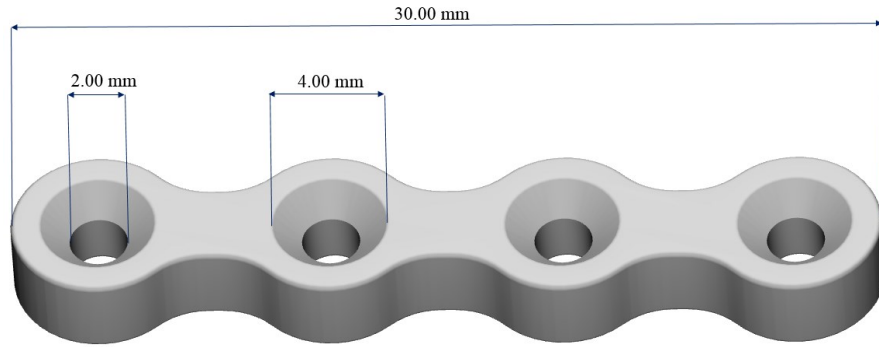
Shape and dimension of the standard skeletal fixation plate used for mechanical testing
